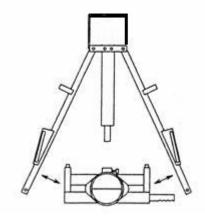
Expand 'A' Frame & Remove From Beam Assembly
